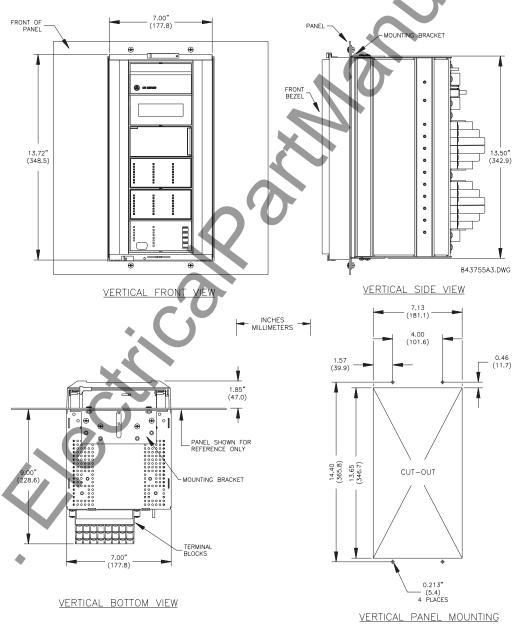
C60 VERTICAL MOUNTING AND DIMENSIONS
